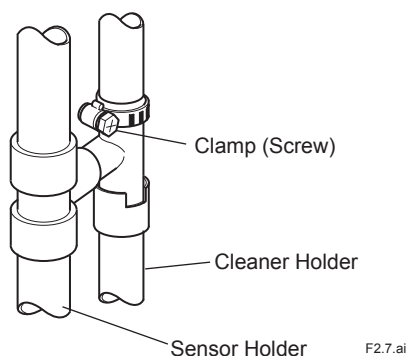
Removal of Sensor Holder (with Cleaner)
